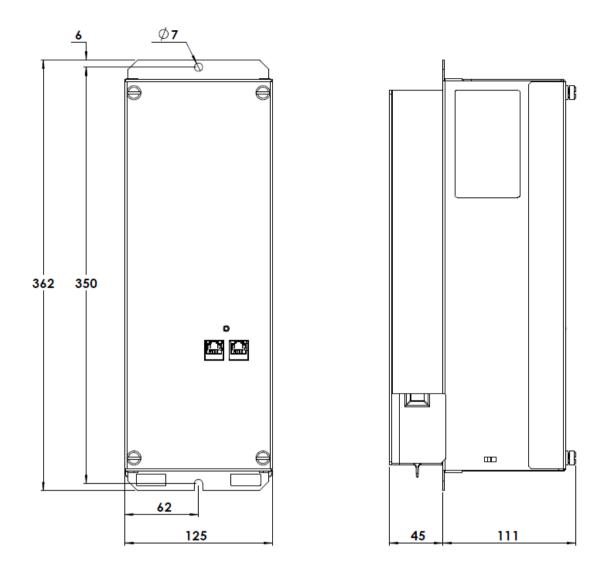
15kW and 24kW PIU dimensions Recessed mount
